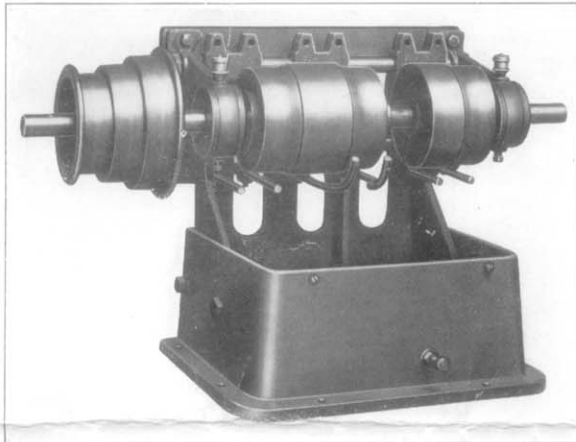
Horizontal Safety Drive Countershaft ball-bearing, cover removed (Patented, June 19, 1929)
